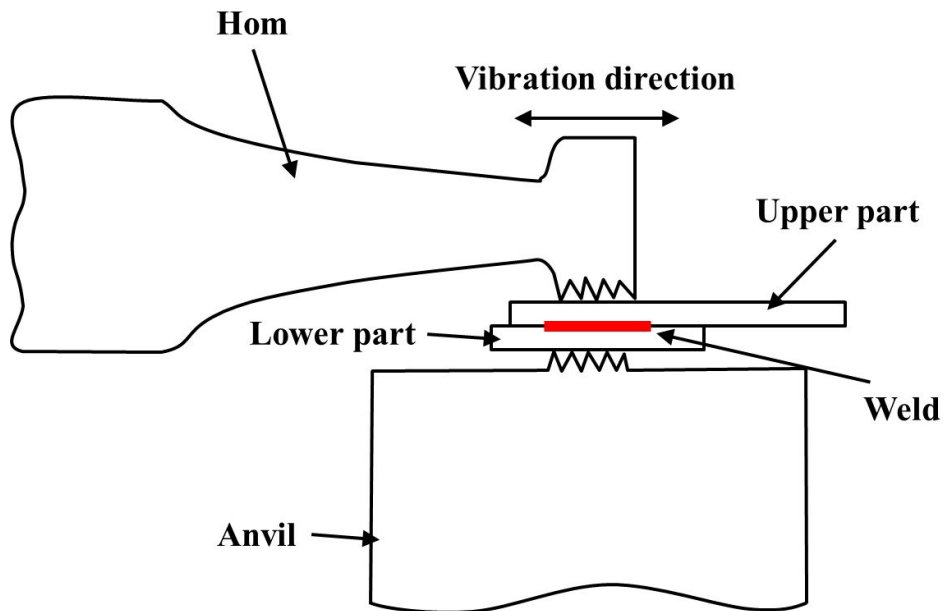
Schematic of ultrasonic welding process[72]
